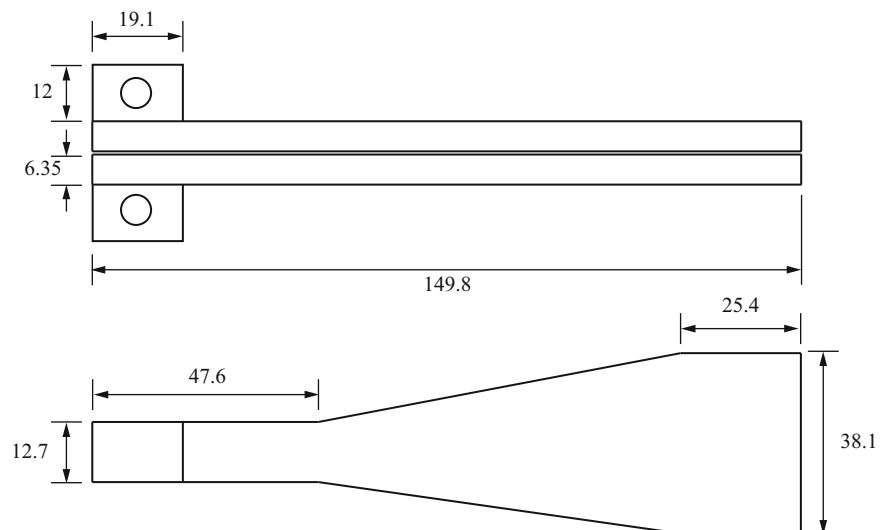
Schematic of a WTDCB, dimensions in mm
